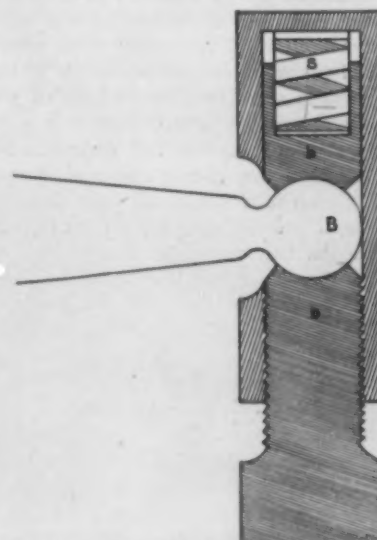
UNIVERSAL STEERING ROD JOINT.
